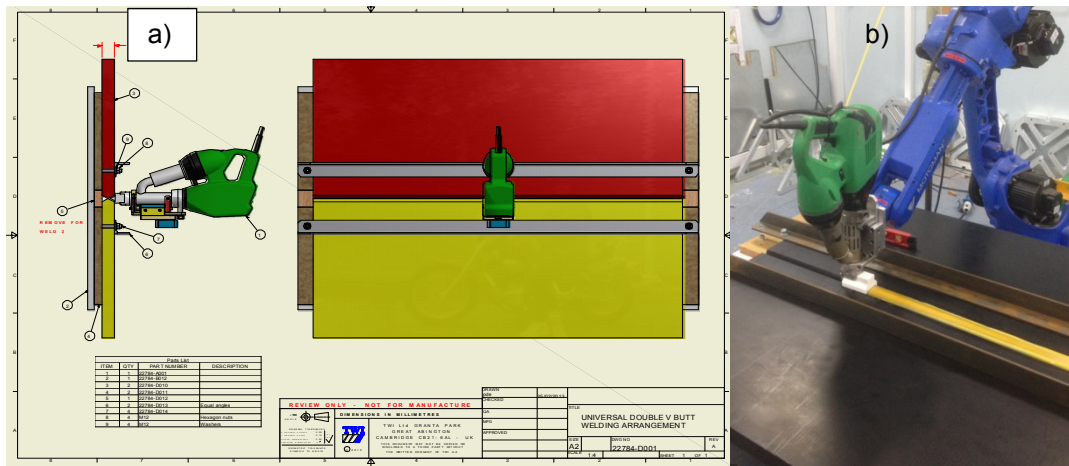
Base plate and clamping bars for manufacturing double-V butt joints: a) design drawing, b) photograph of the final assembly.
